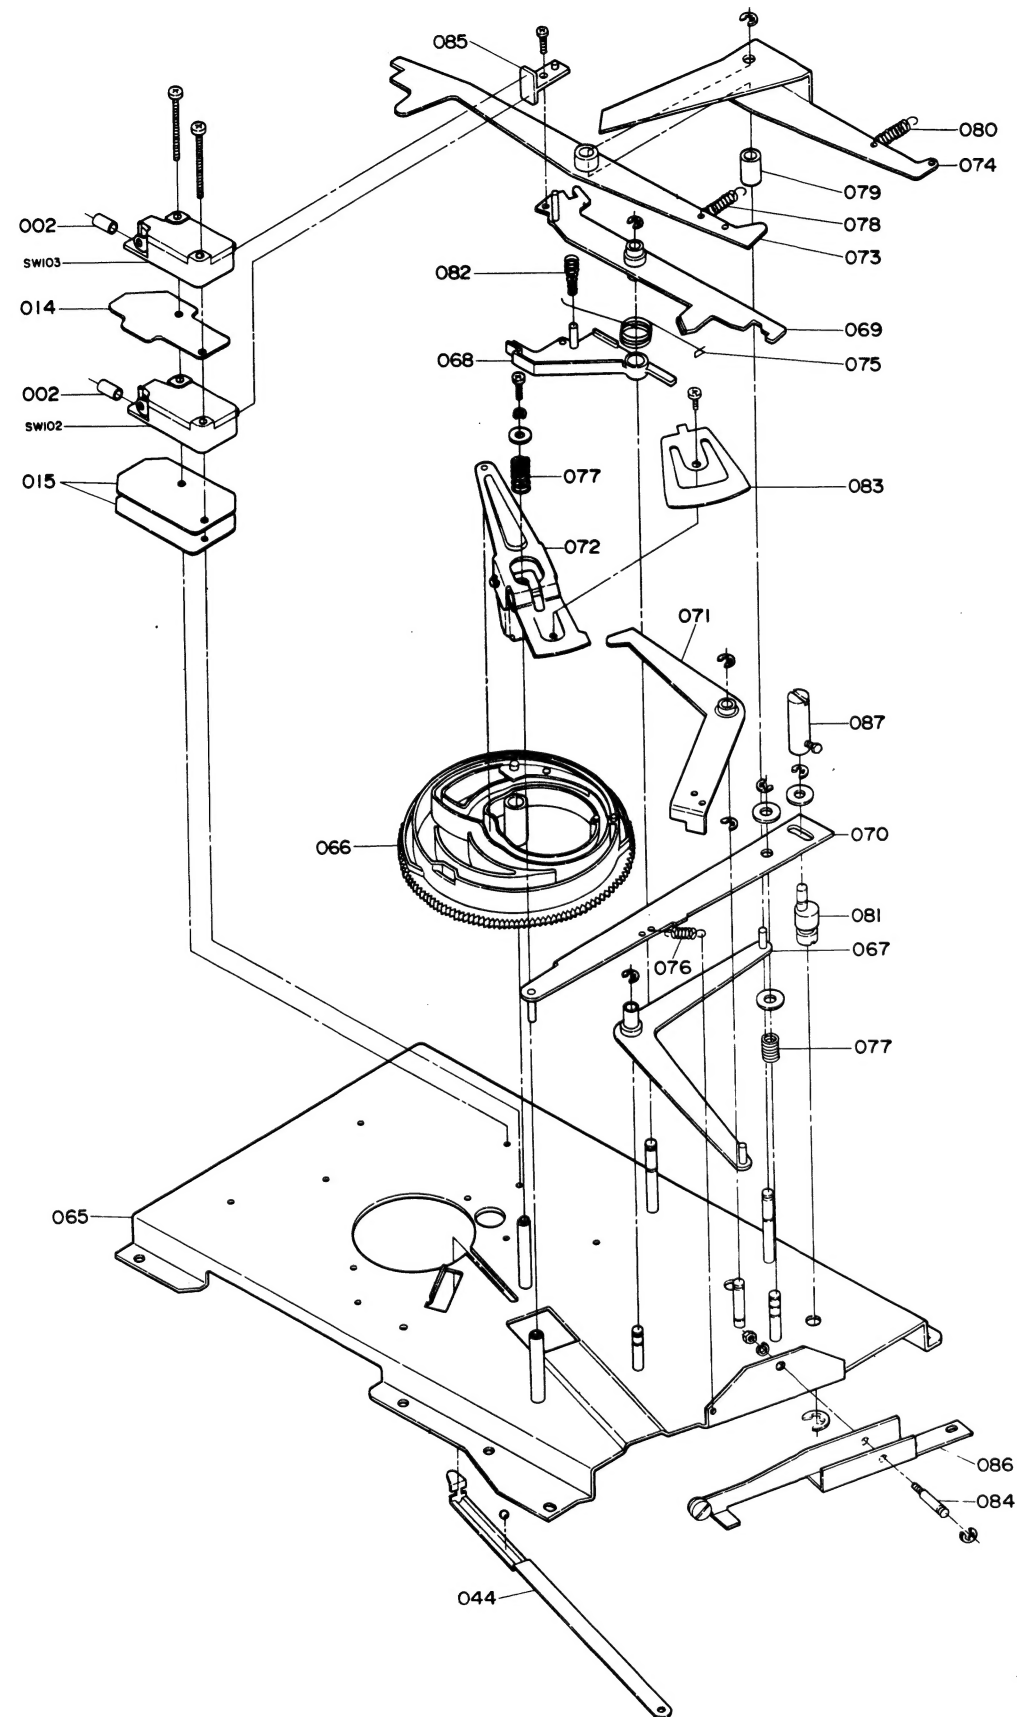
PLAYER EXPLODED VIEW (Sub-Chassis)
